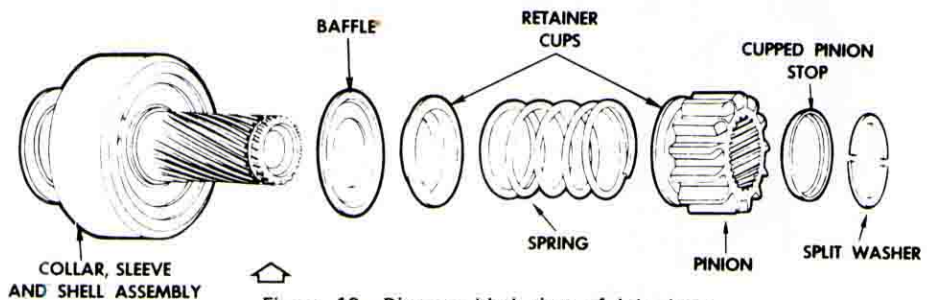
Disassembled view of late type heavy duty sprag clutch drive assembly.
